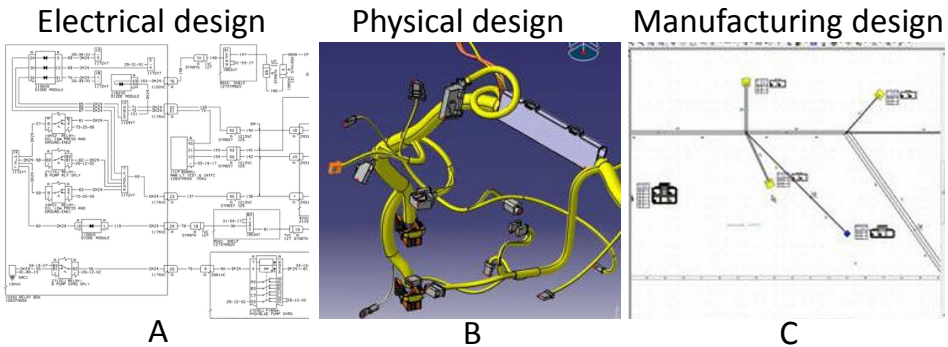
Results of the electrical design, physical design, and manufacturing design
